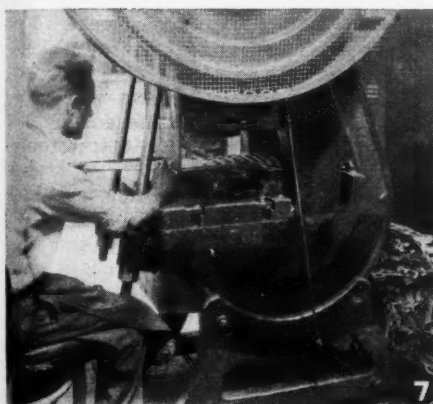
Blanking out plywood gussets on a punch press. Fig. 8—Tools used to cut the gussets. Fig. 9—The raw stock is shown in the center, with a finished piece at the right. The production of an oval hole through the axis of the bar is an interesting operation. Fig. 10—Welding quadrupod braces for the landing gear. Jigs are used for all welding operations.
